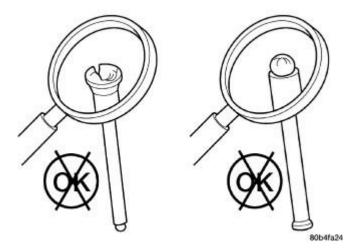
Inspecting Push Rod For Cracks Courtesy of CHRYSLER GROUP, LLC
